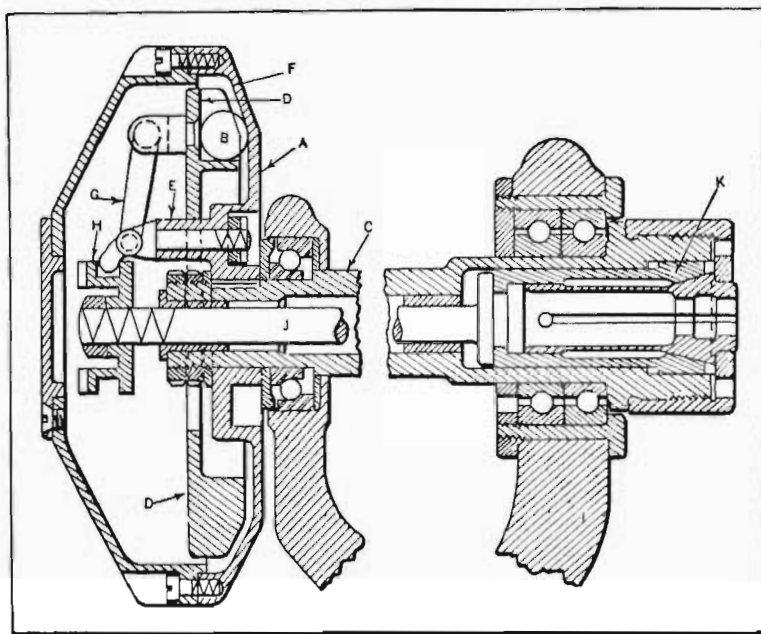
Mechanism Which Automatically Closes Chuck When Spindle Rotates
